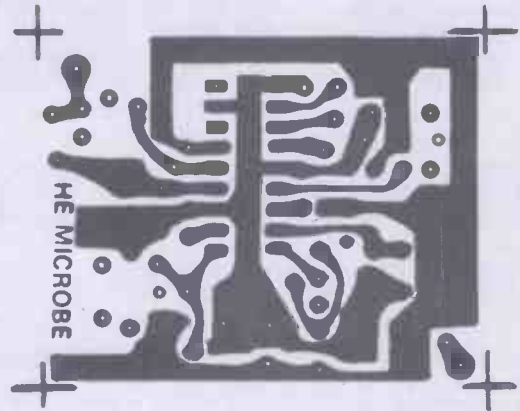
PCB layout for the Microbe receiver. As with the transmitter, this layout MUST be strictly followed.
